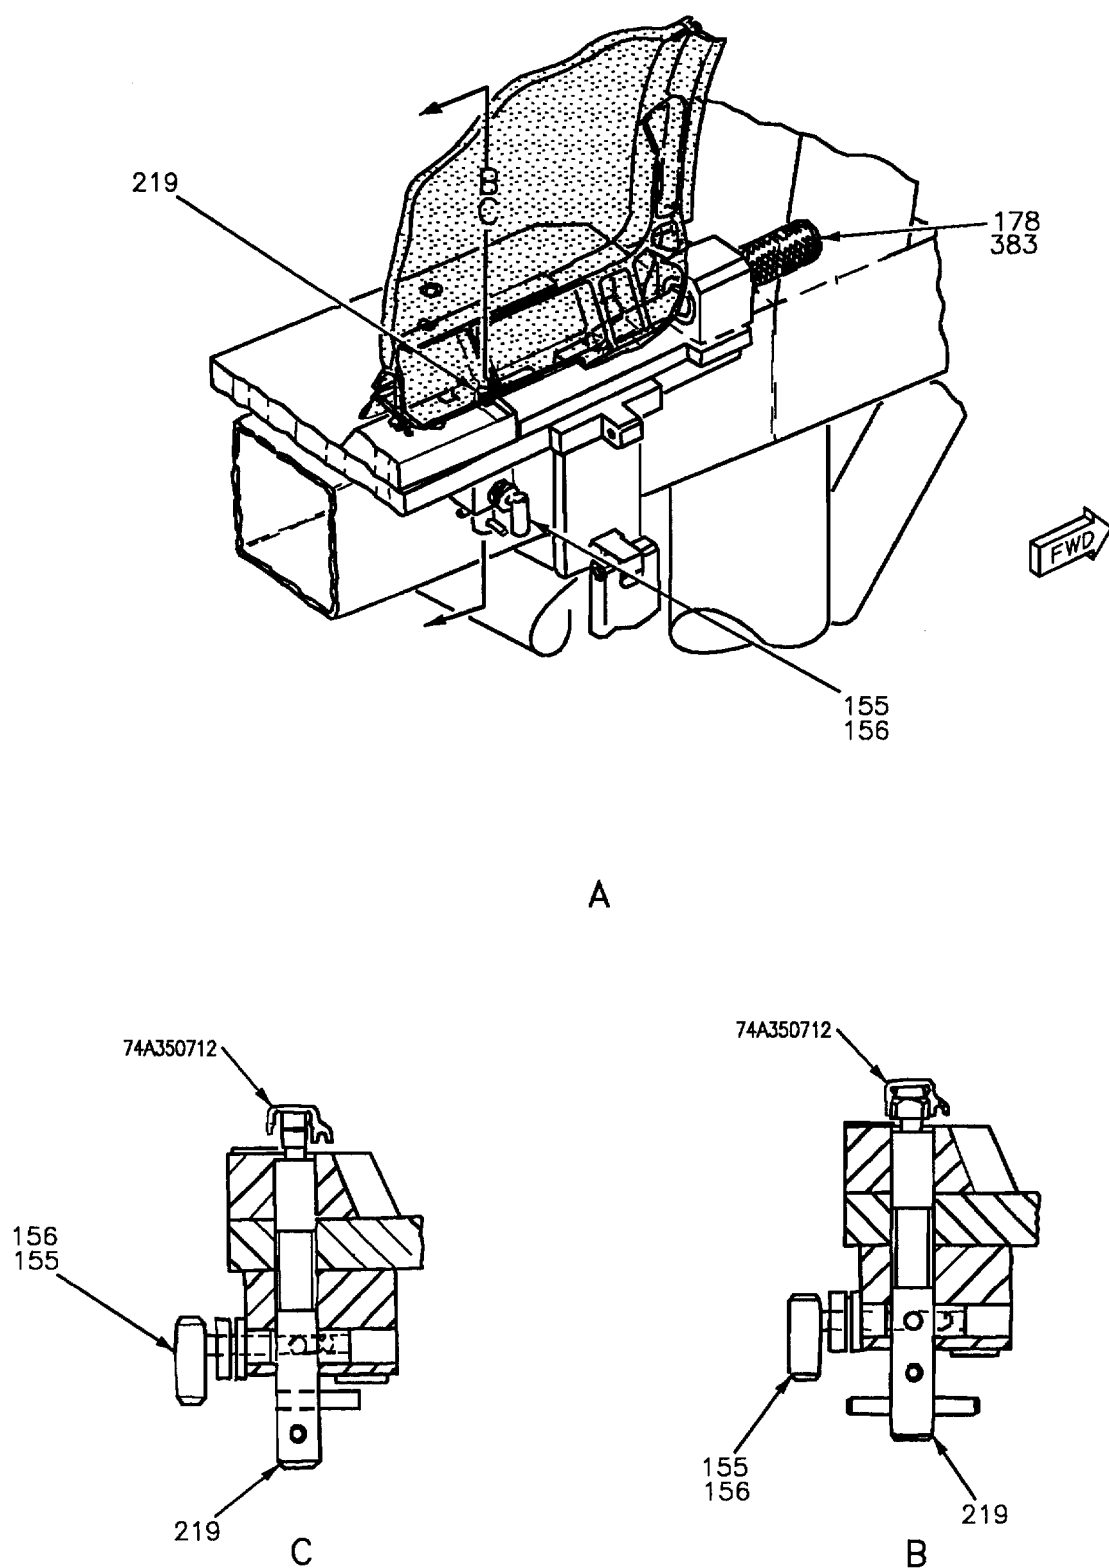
Inspection or Replacement - Hinge and Pivot Stop (Sheet 2)
